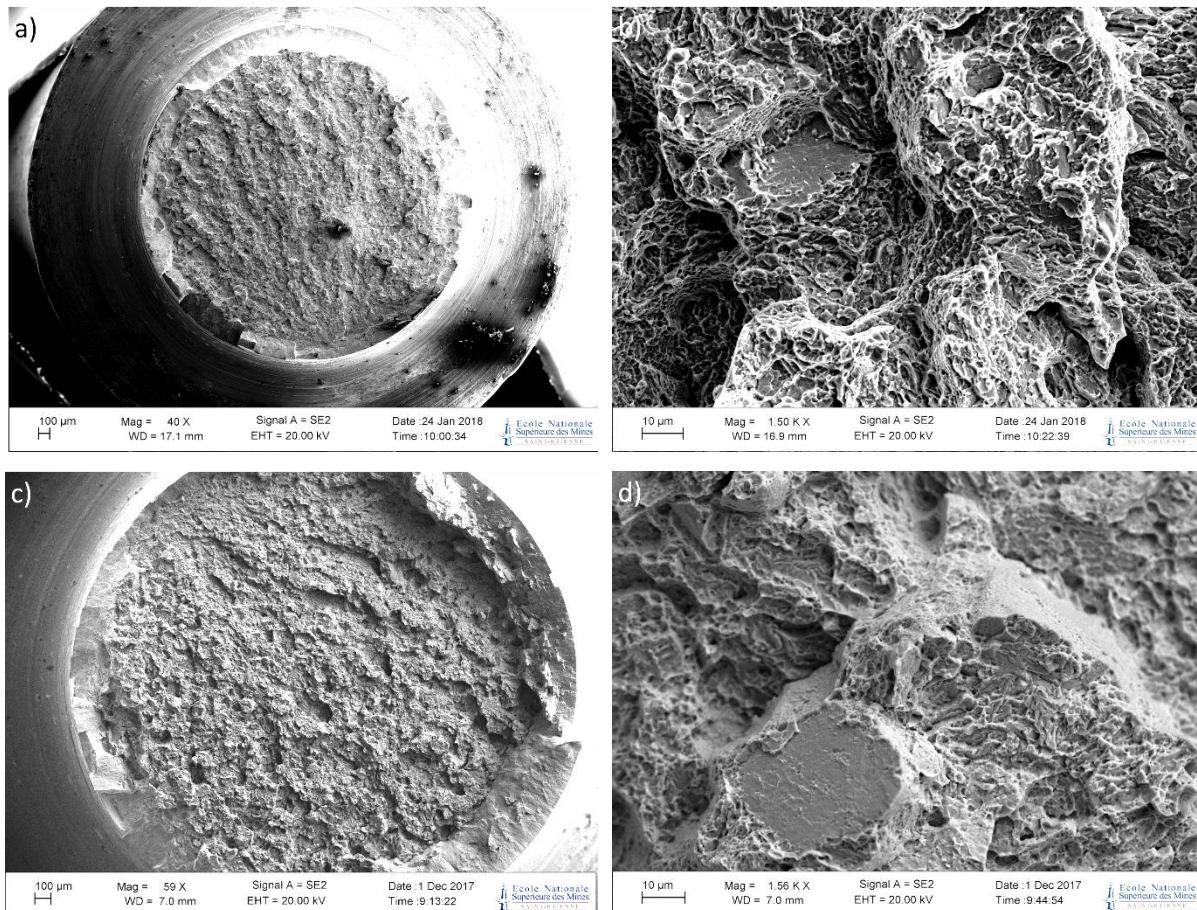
Fracture surfaces showing the fractured surface for: 10^{-6} mm/s in a) and b) and 10^{-5} mm/s in c) and d). Both of the tests are done on uncharged samples.
